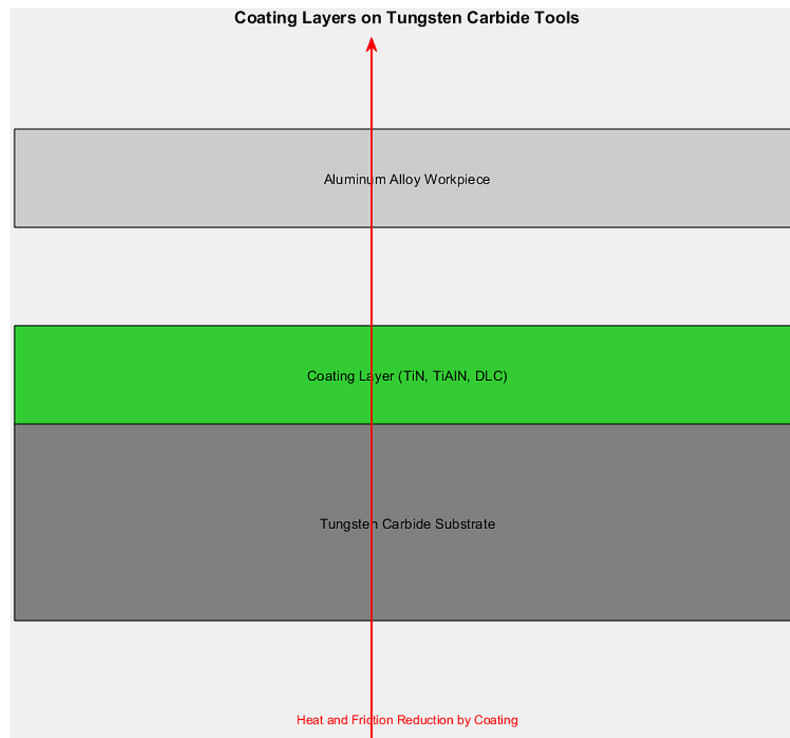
Diagram showing the coating layer (e.g., TiN, TiAlN, DLC) on tungsten carbide tools, reducing friction and heat while interacting with aluminium alloys
